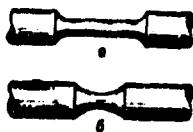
Shape of the working parts of specimens for the fatigue test: a) With constant cross section; b) with corset shape.
